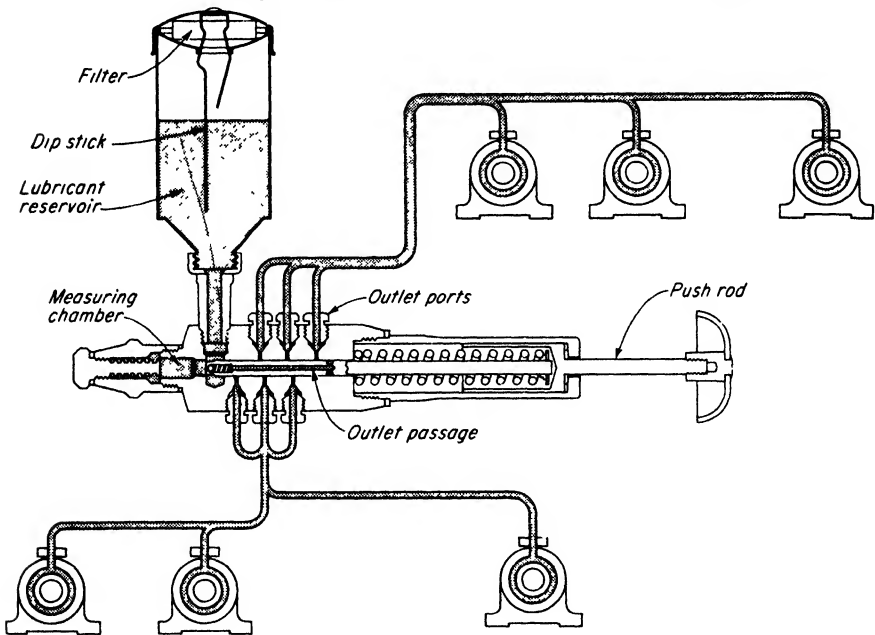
Arrangement of multiple feed lines that can be attached to the master hand-gun lubricator shown at the center. (Lincoln Engineering Co.)
